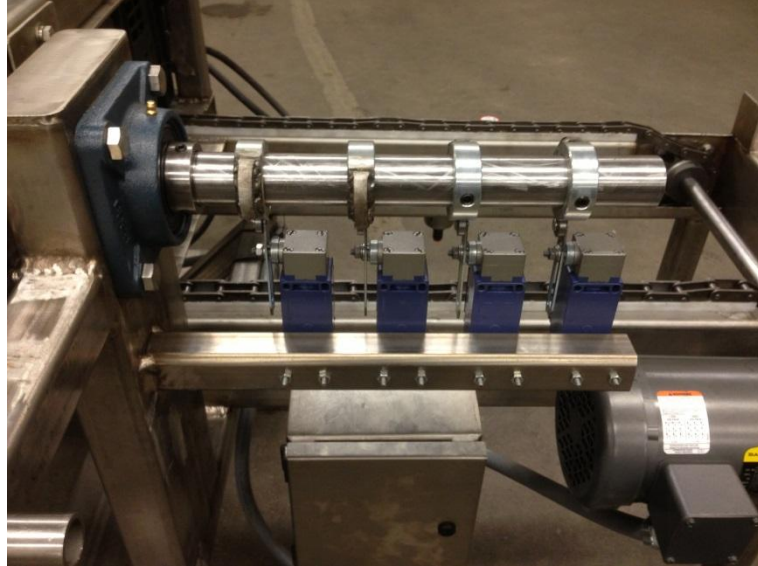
Adjusting Cams on Dumper Shaft for Limit Switches.
